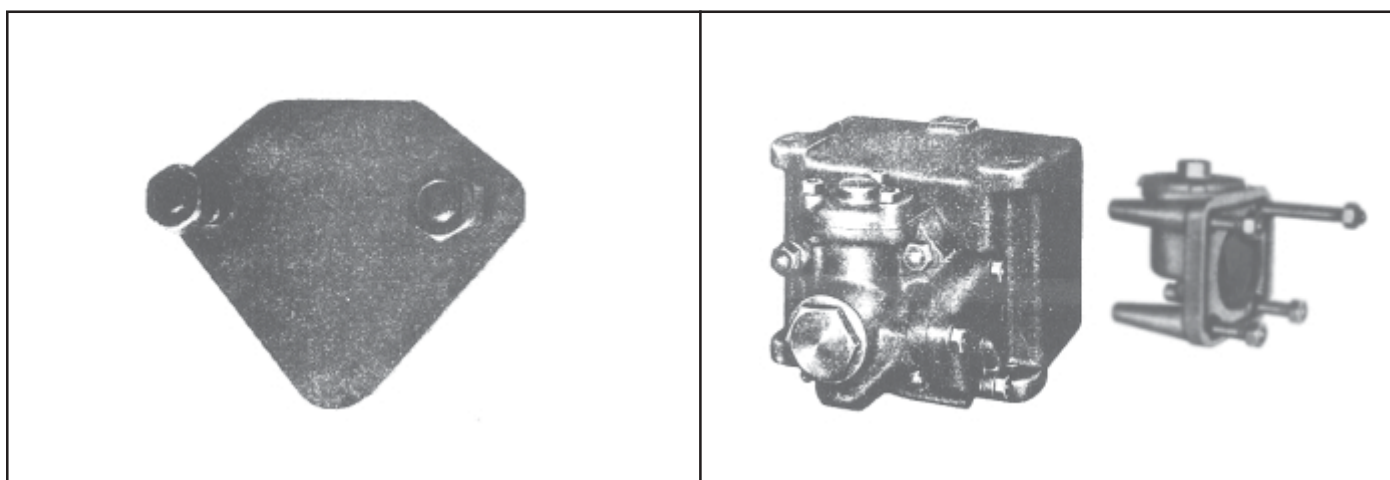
Shipping Cover for Brake Cylinder Release Valve
